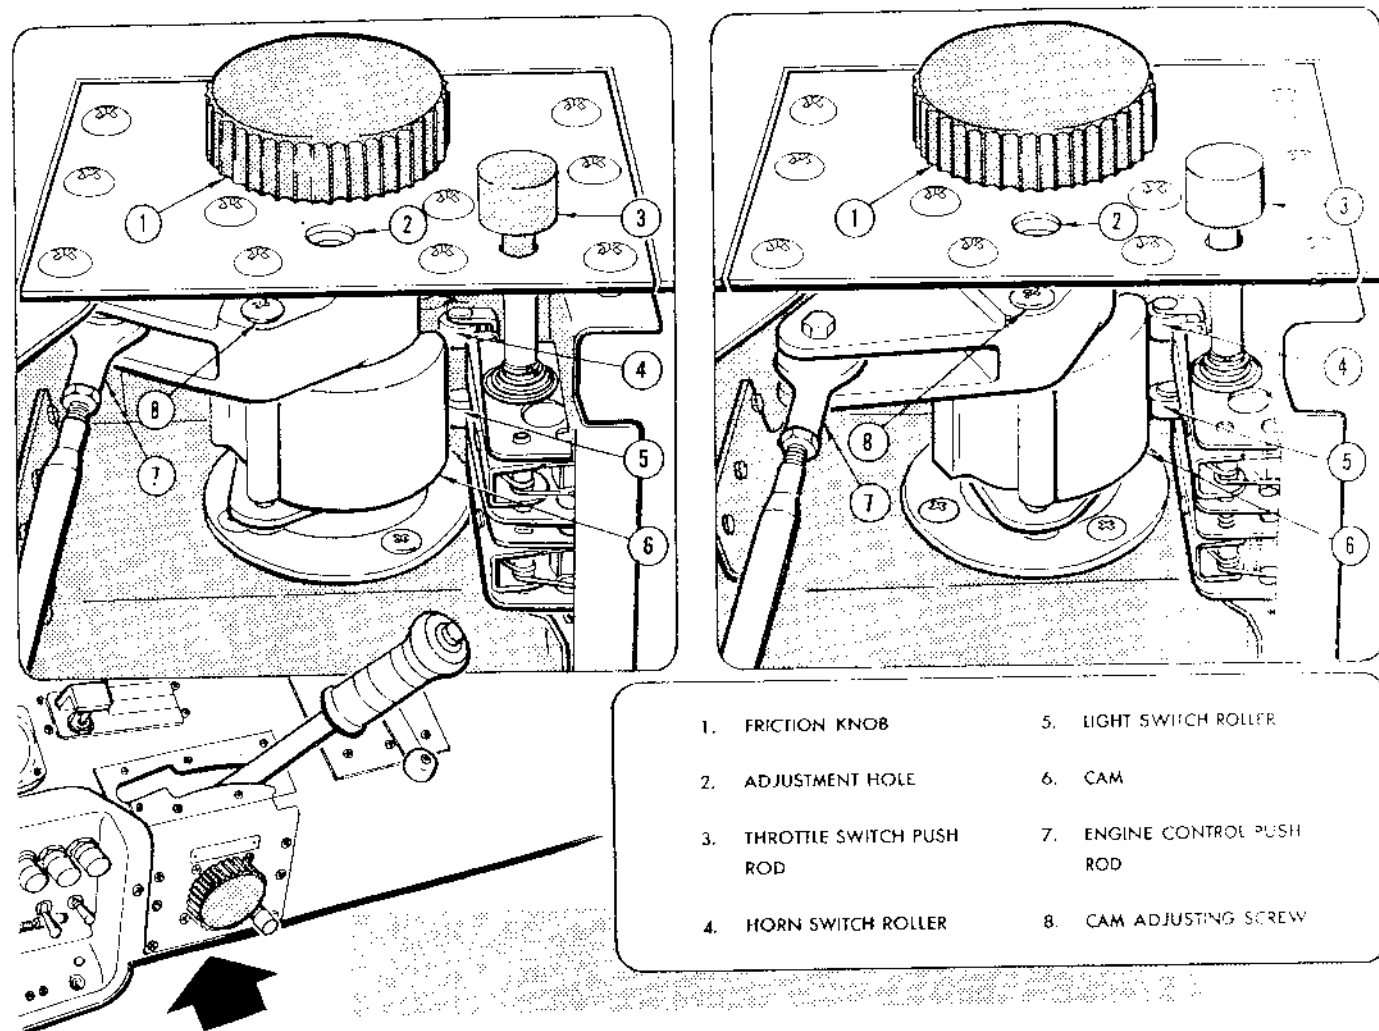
Throttle Switch Adjustment, P-80A-1, P-80A-5, and FP-80A-5 Airplanes
